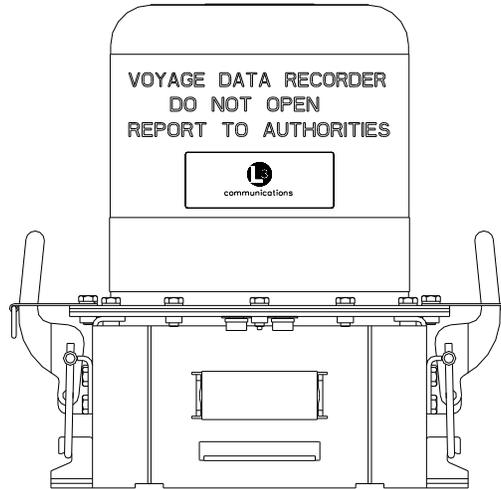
L3 SVR-01 Fixed SFRM Capsule
